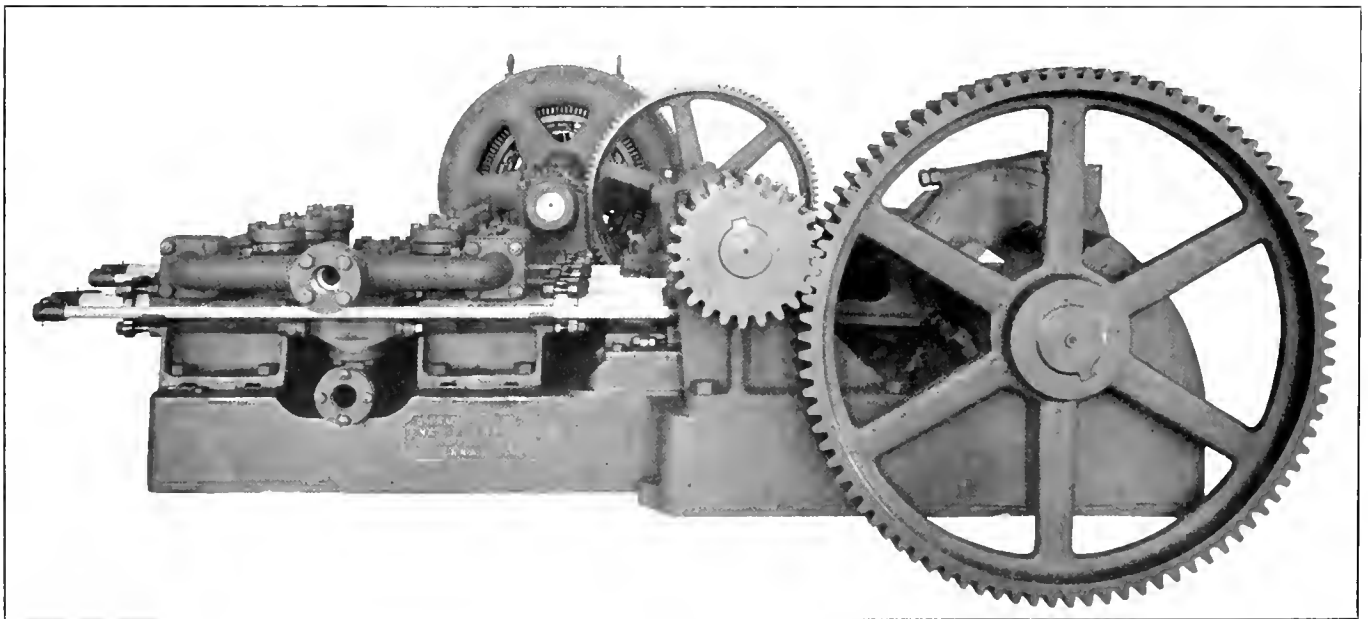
Heavy Duty Pump for Hydraulic Flange Press.
